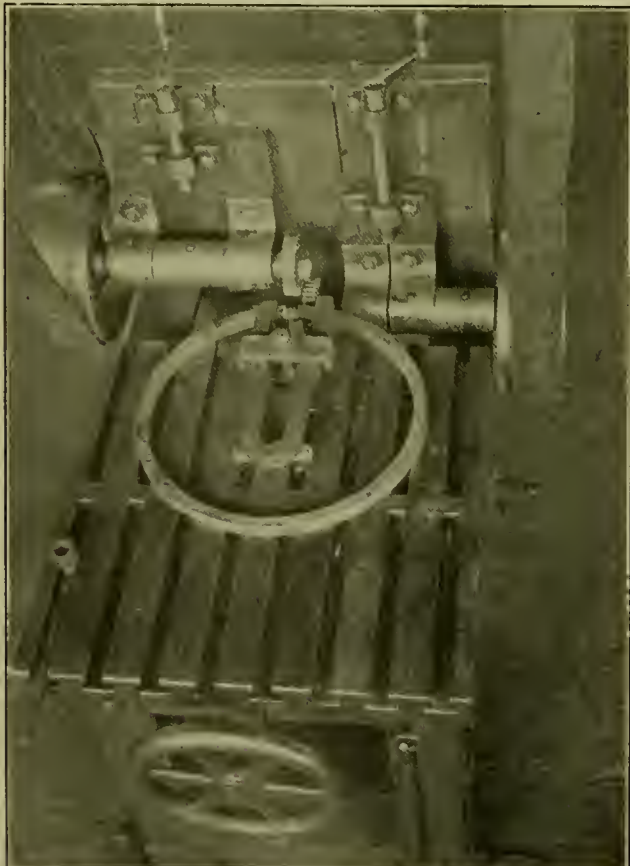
SNAP RING MILLING MACHINE. WHAT A MACHINE FOREMAN WILL DO WHEN ENCOURAGED.
